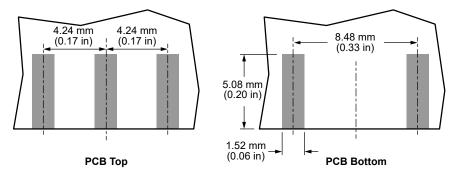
Recommended PCB Dimensions for the CONSMA003.042-L-G
